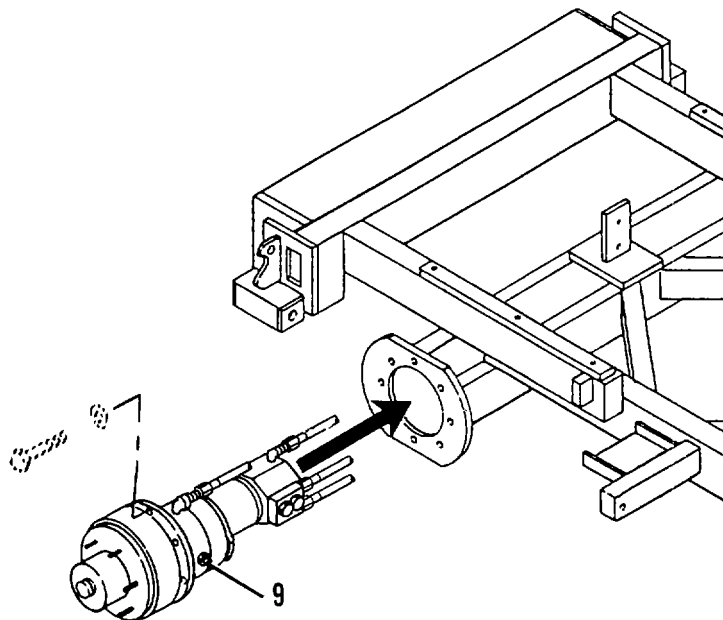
Hydraulic Motor, Brake and Drive Hub, Replacement.
